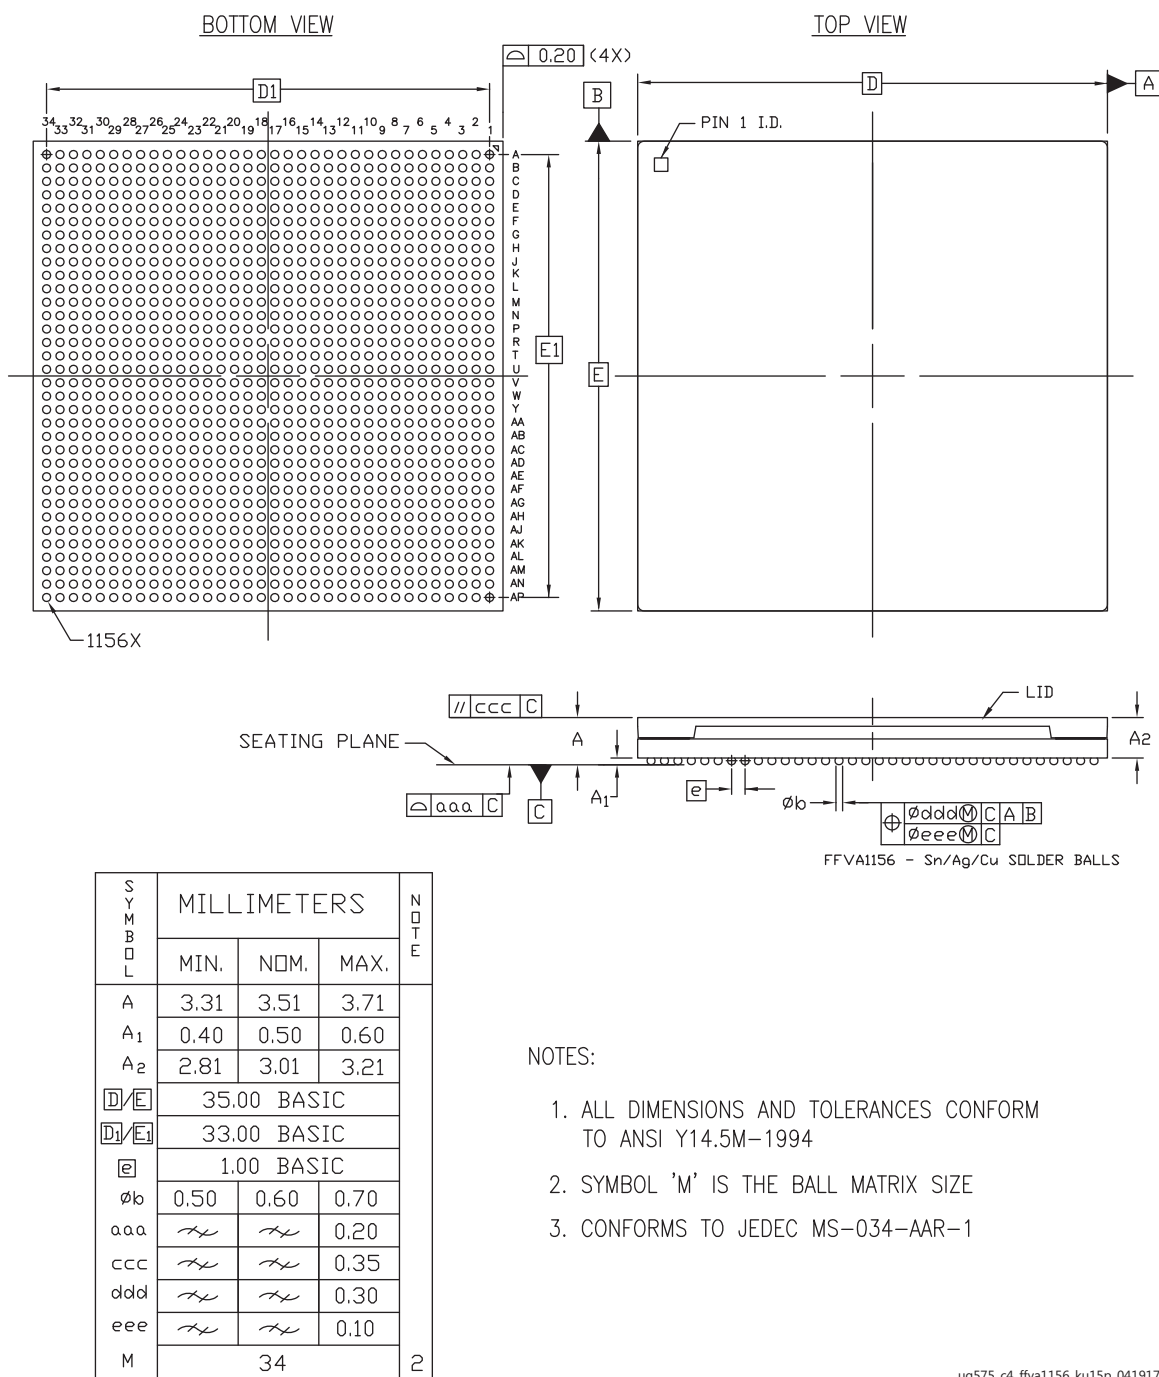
Package Dimensions for FFVA1156 (XCKU15P)
